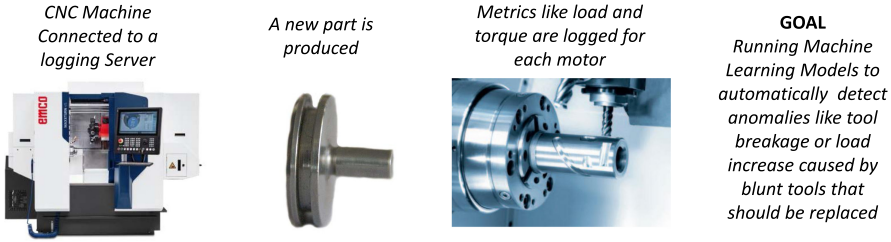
Outages and machine deterioration inflict high costs in the manufacturing domain. The goal is to use machine learning models to detect tool deterioration and breakage to alert the machinist to avoid damages to the part, tools and the machine.
